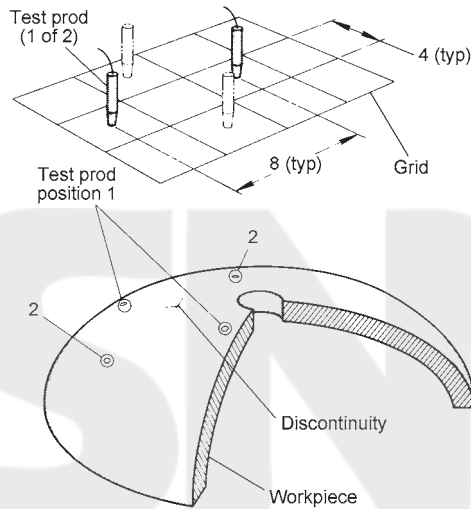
Grid pattern and prod positions used in one plant for the magnetic particle inspection of forgings using prods and the dry powder technique. Dimensions are in inches. Source: Ref 1
